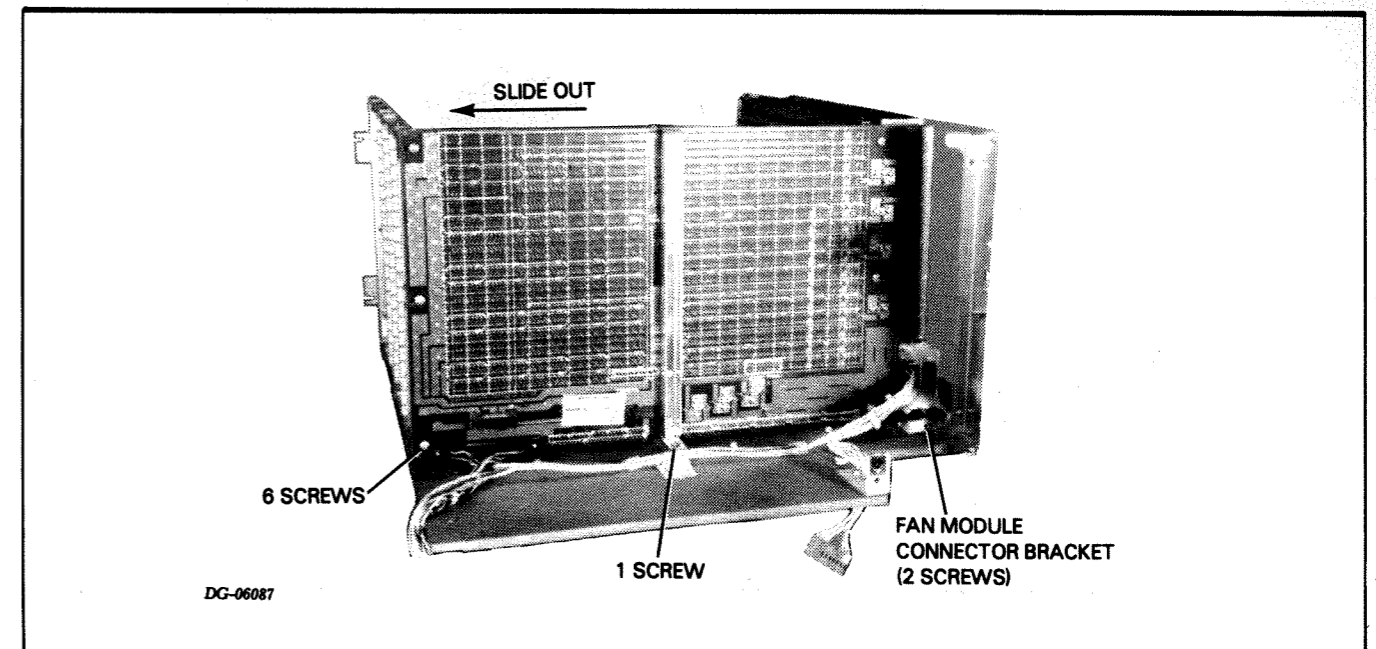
BACKPANEL READY TO SLIDE OUT OF 16-SLOT CHASSIS
